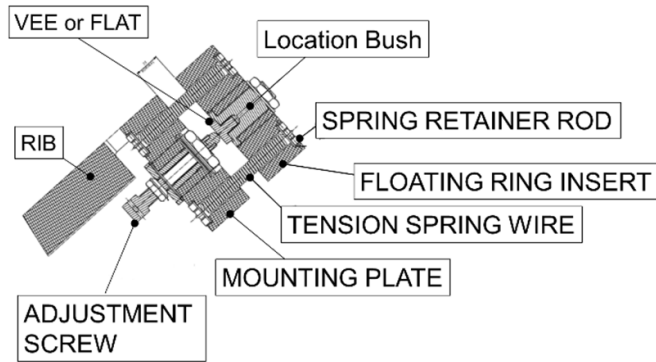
Top view cross section of the Vee or Flat 'Adjustment Screw' assembly listing the main components.
